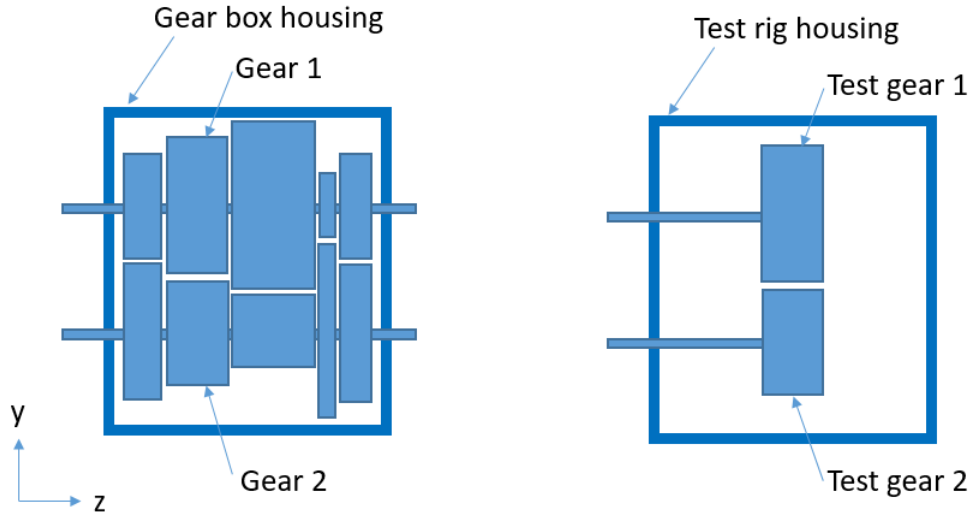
Axial view of gears in a gearbox and in a possible test rig
